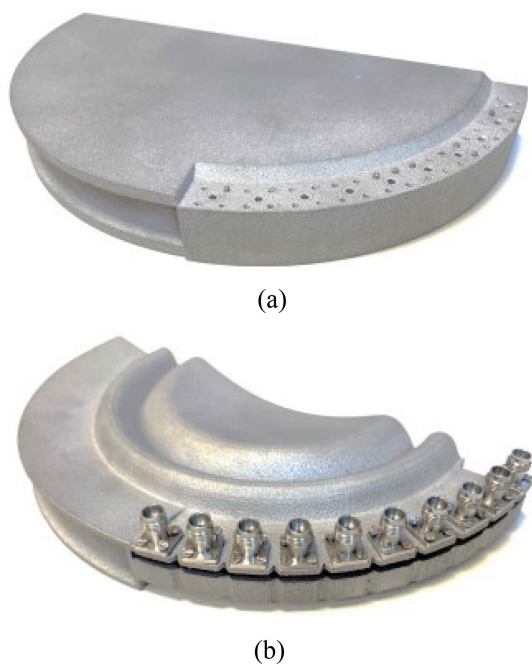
Ka-band half-Luneburg geodesic lenses manufactured as a single part using LPBF [66]. (a) Original single-block part. (b) Fully trimmed design.
